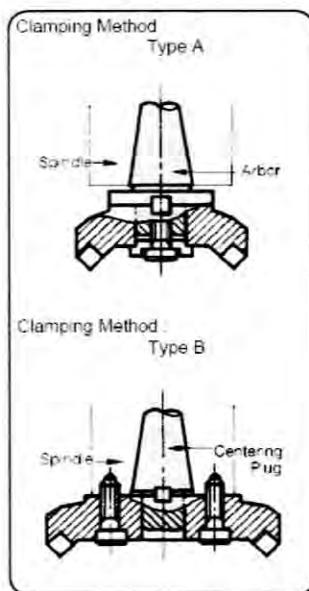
Clamping Method of Tool Shanks with Inserts
